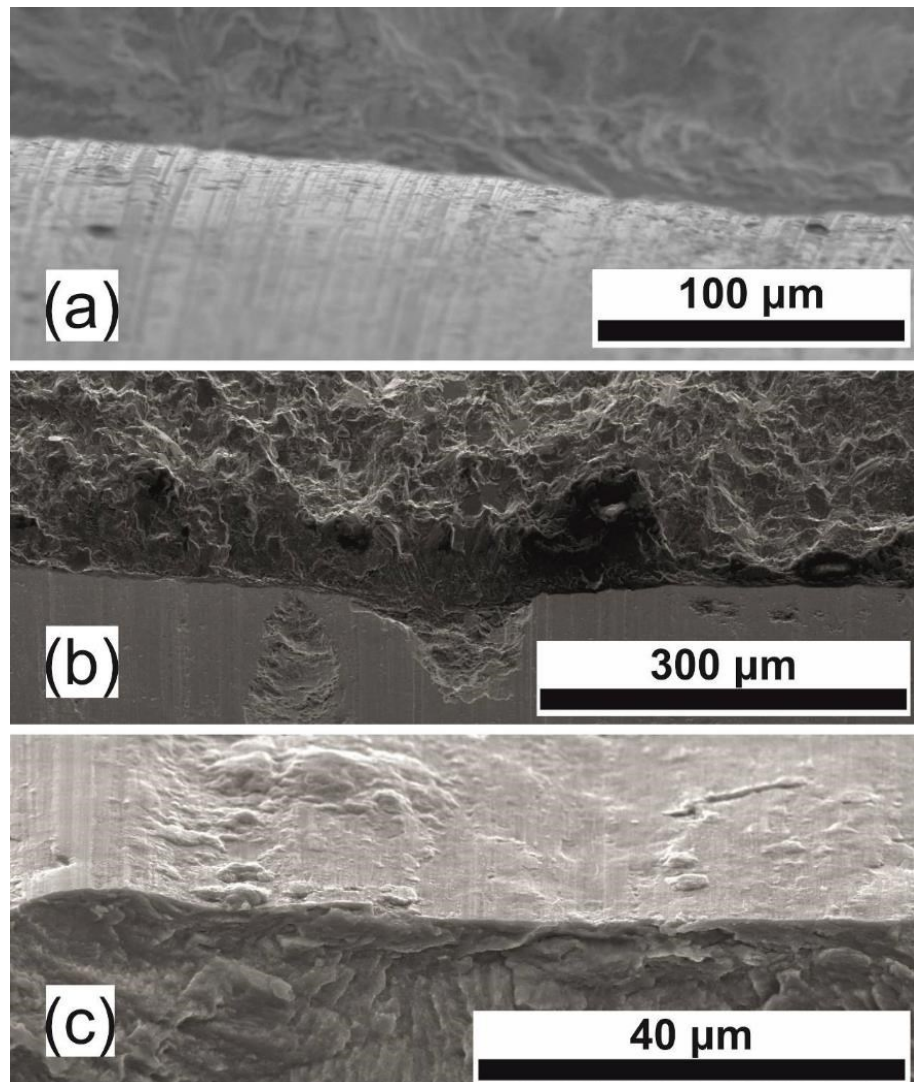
Surface defects a) Specimen 2-3 @ 227132 cycles; b) Specimen 1-10 @ 322505 cycles; c) Specimen 1-8 @ 230388 cycles
